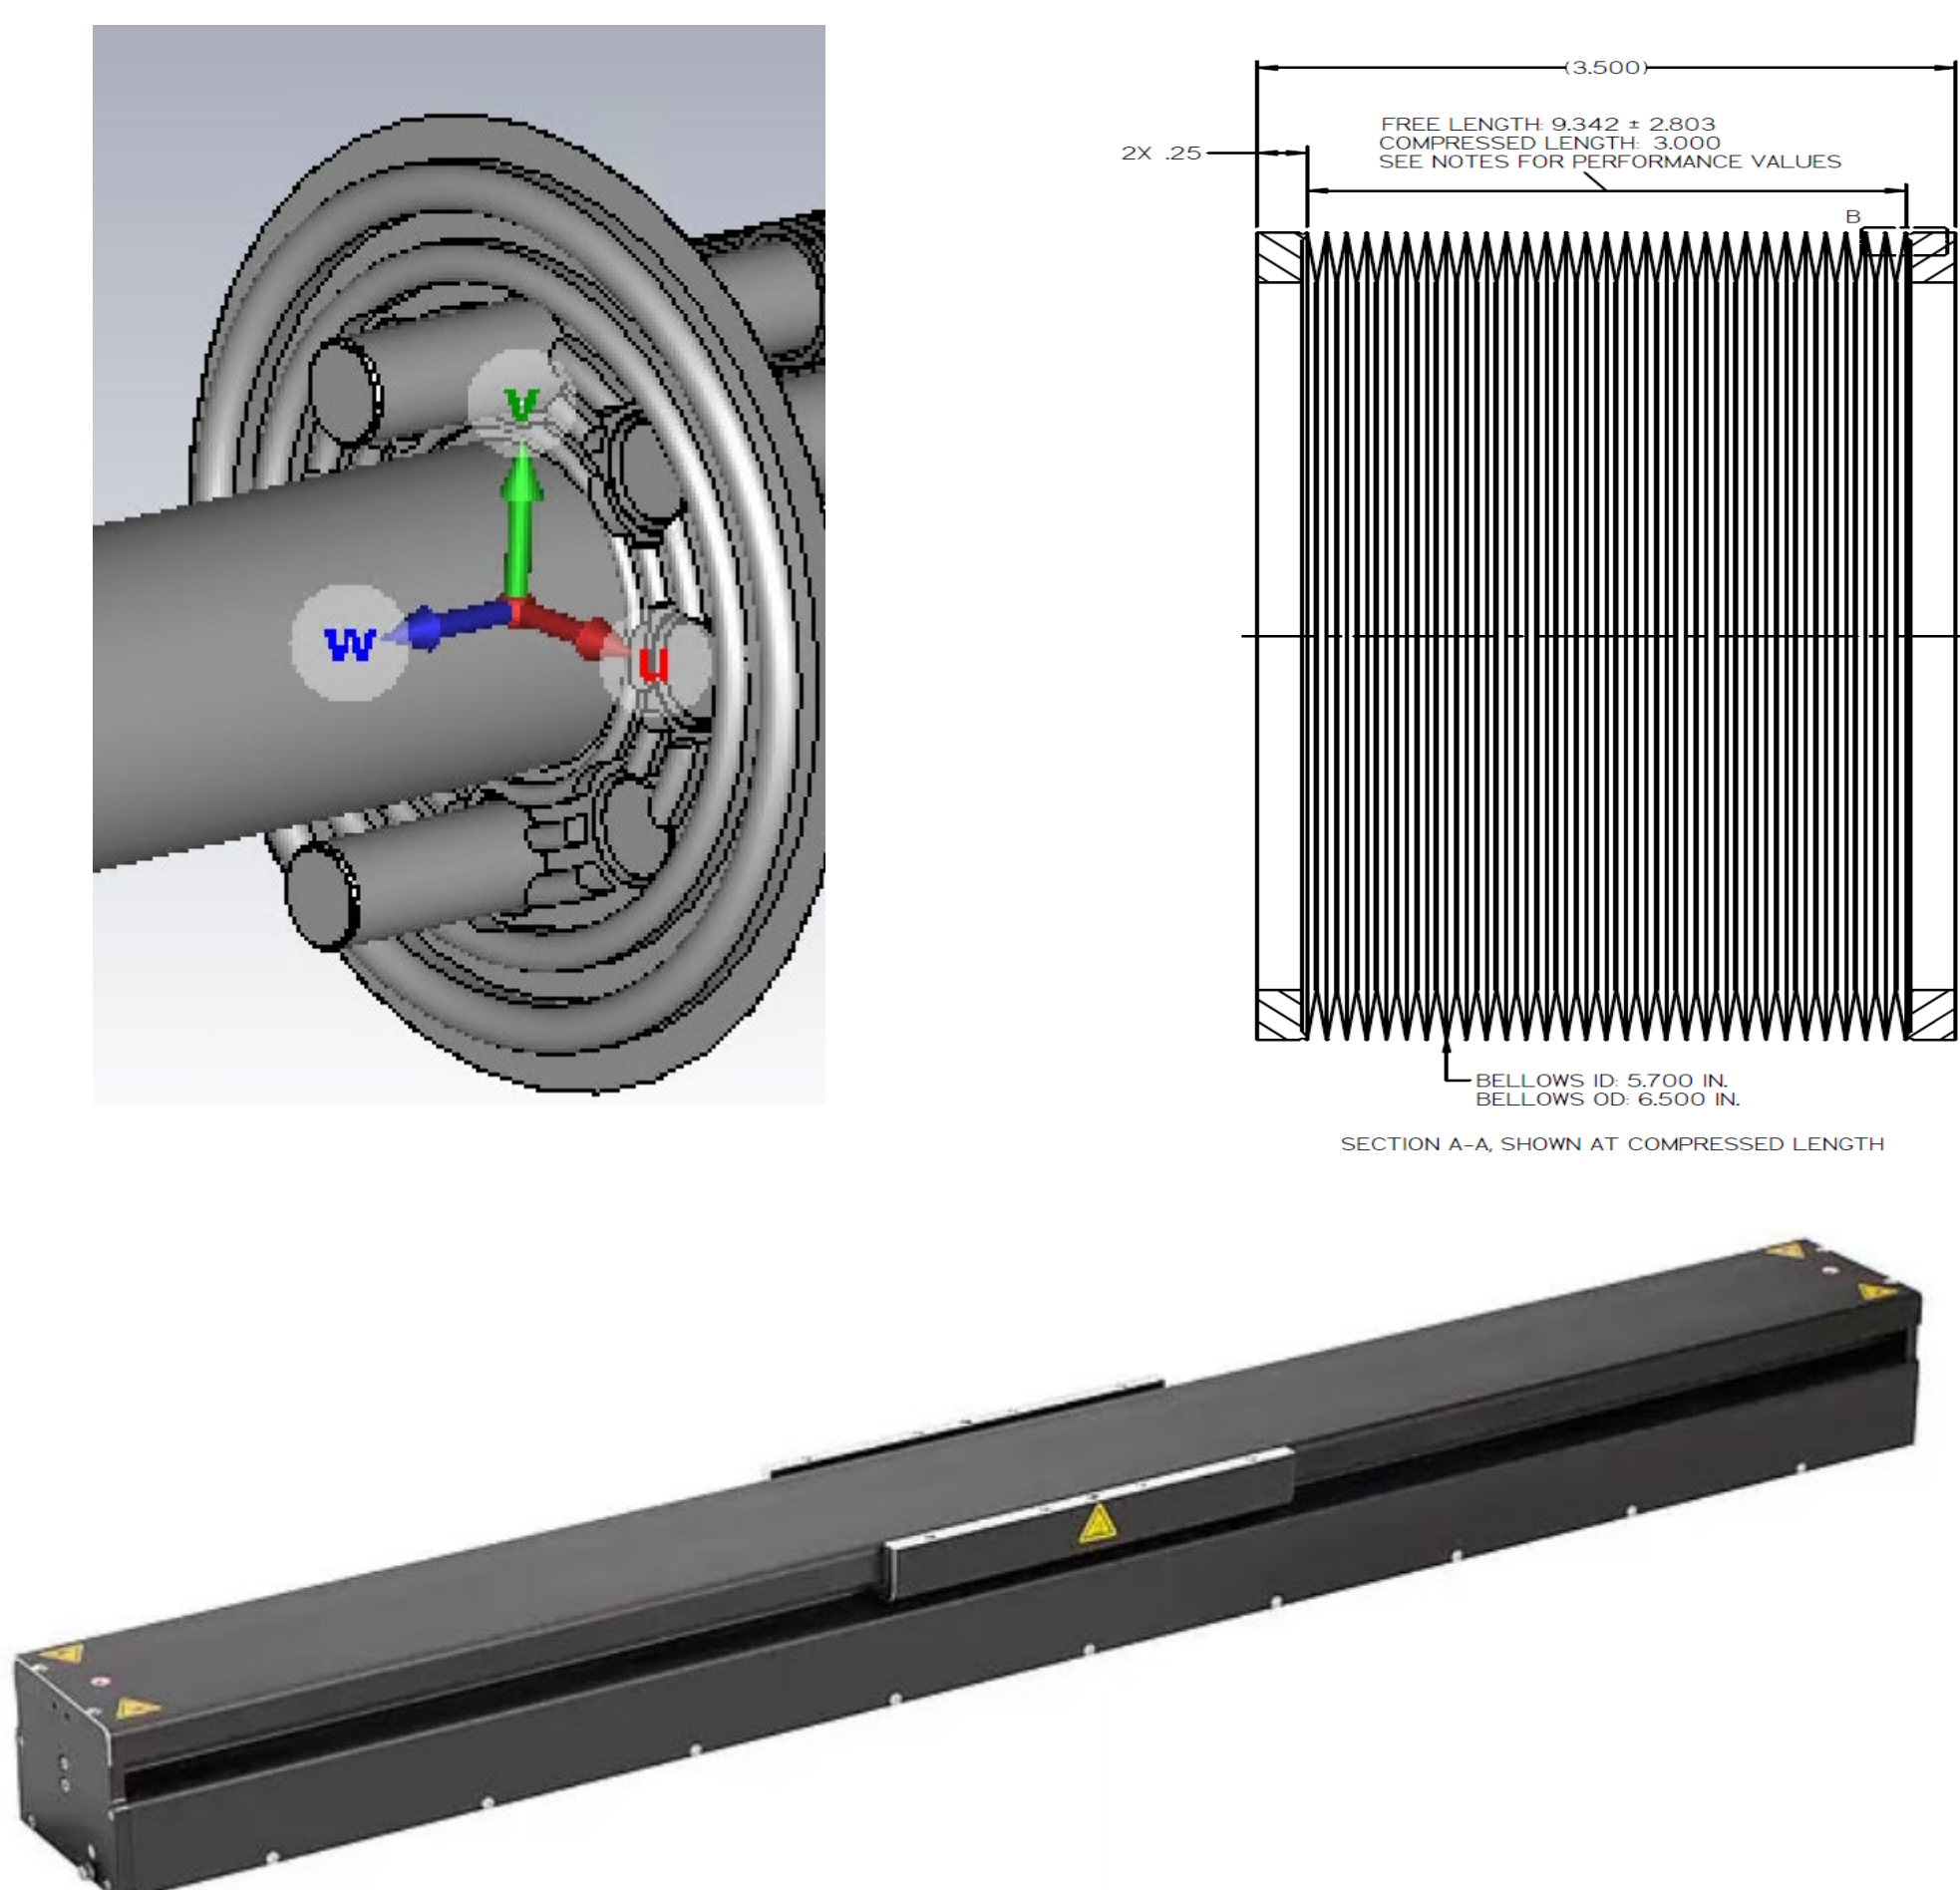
Distributed piston pairs, edge-welded bellows part, and PI 857 Linear Stage capable of handling MI tuning requirements.
